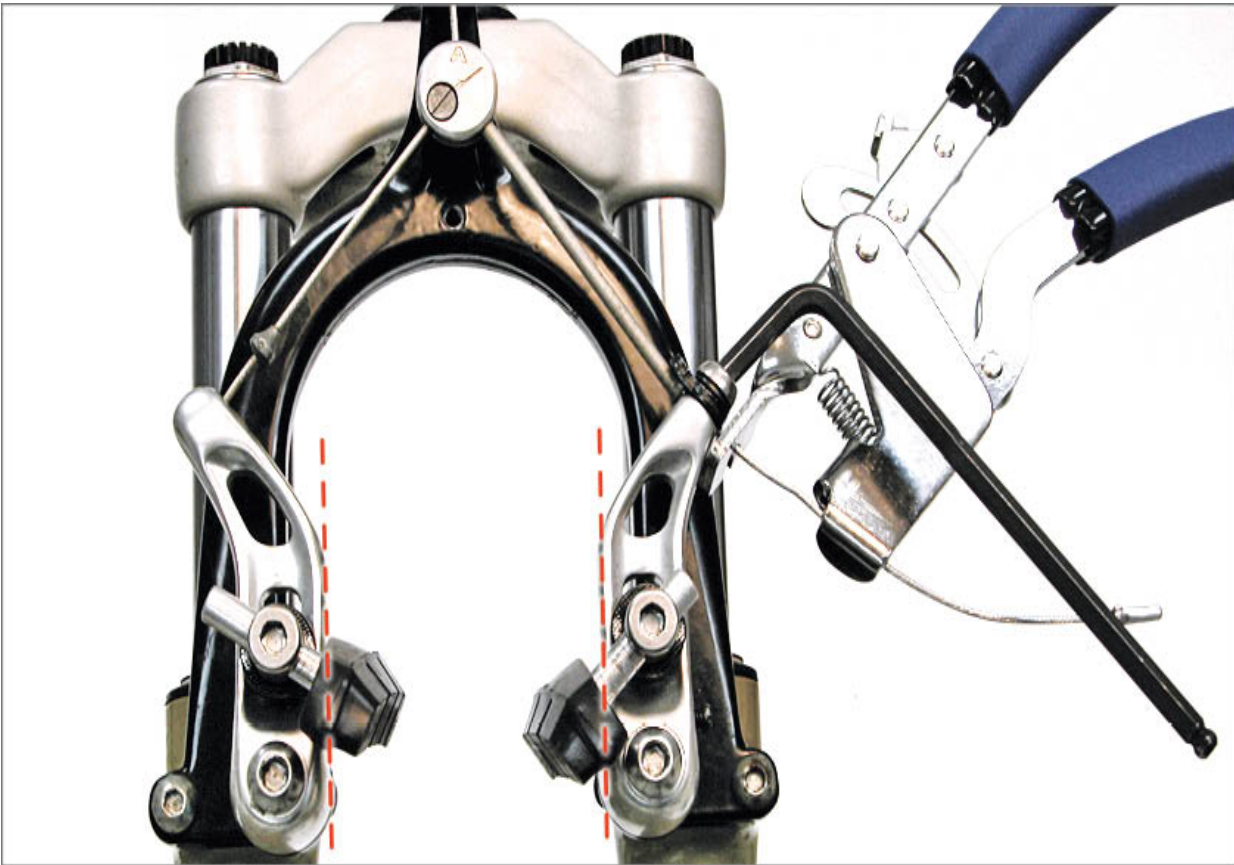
Adjust brake cable length at pinch bolt until arms are close to parallel
